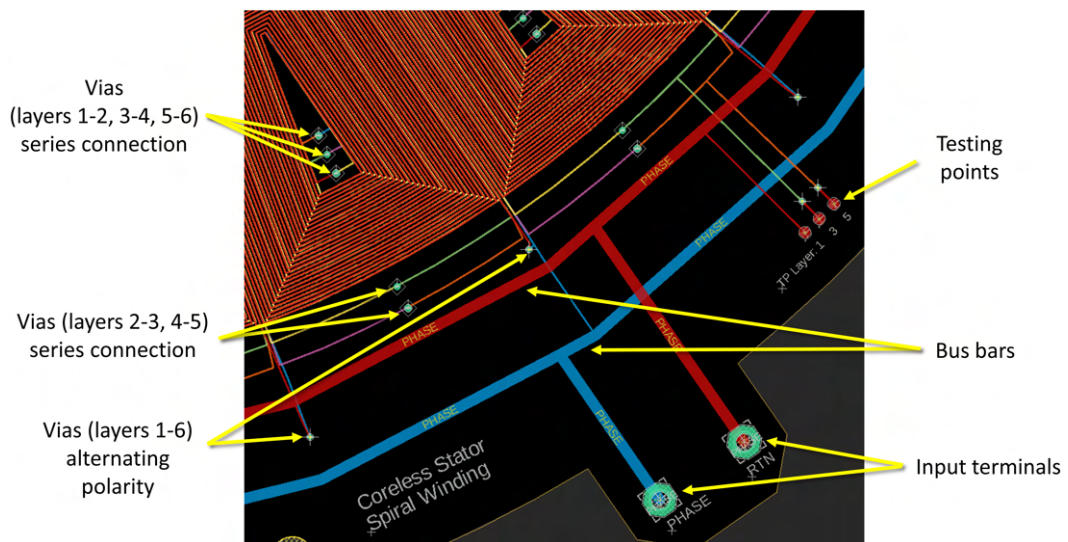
Illustration of the printed circuit board (PCB) winding implementation for the proposed spiral winding stator.
